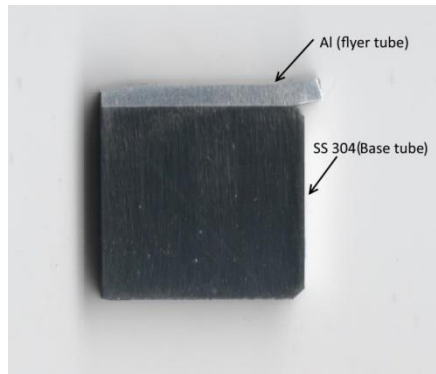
Cross section of the MPW welded member cut out using WEDM for hardness measurement and metallographic observation
